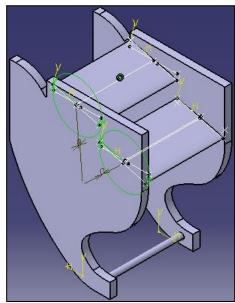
Assembly – Negative (-15°) Angle of Attack
